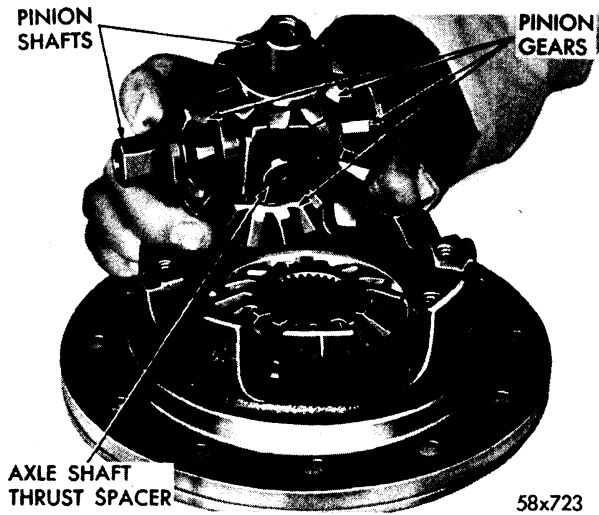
Removing or Installing Pinion Shafts and Pinion Gears
